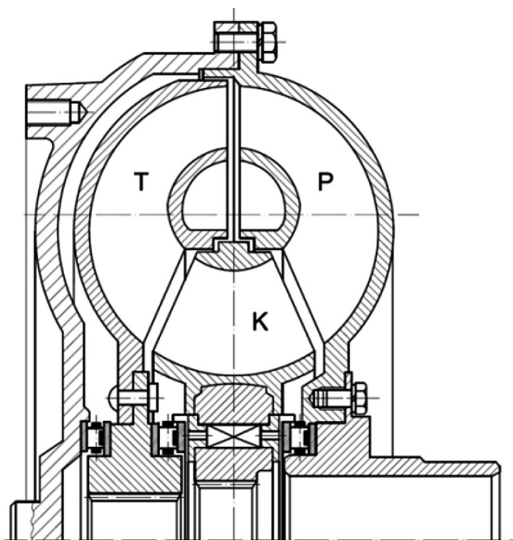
Construction of the hydrodynamic torque converter [2]: *P* – pump impeller, *T* – turbine impeller, *K* – stator impeller
